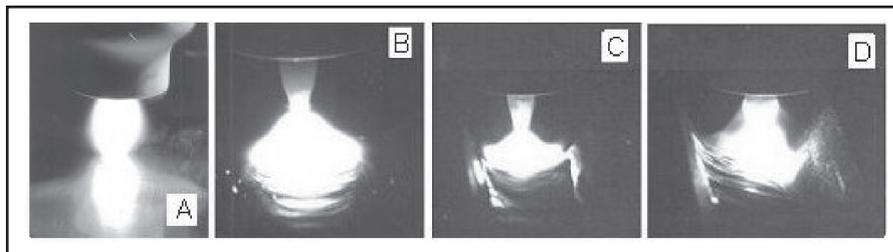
Close-up view of the arc and the electrode during welding. A — Shortly after arc ignition; B — during buildup welding; C — passes with filler metal; D — electrode point burned strongly during filler pass.
